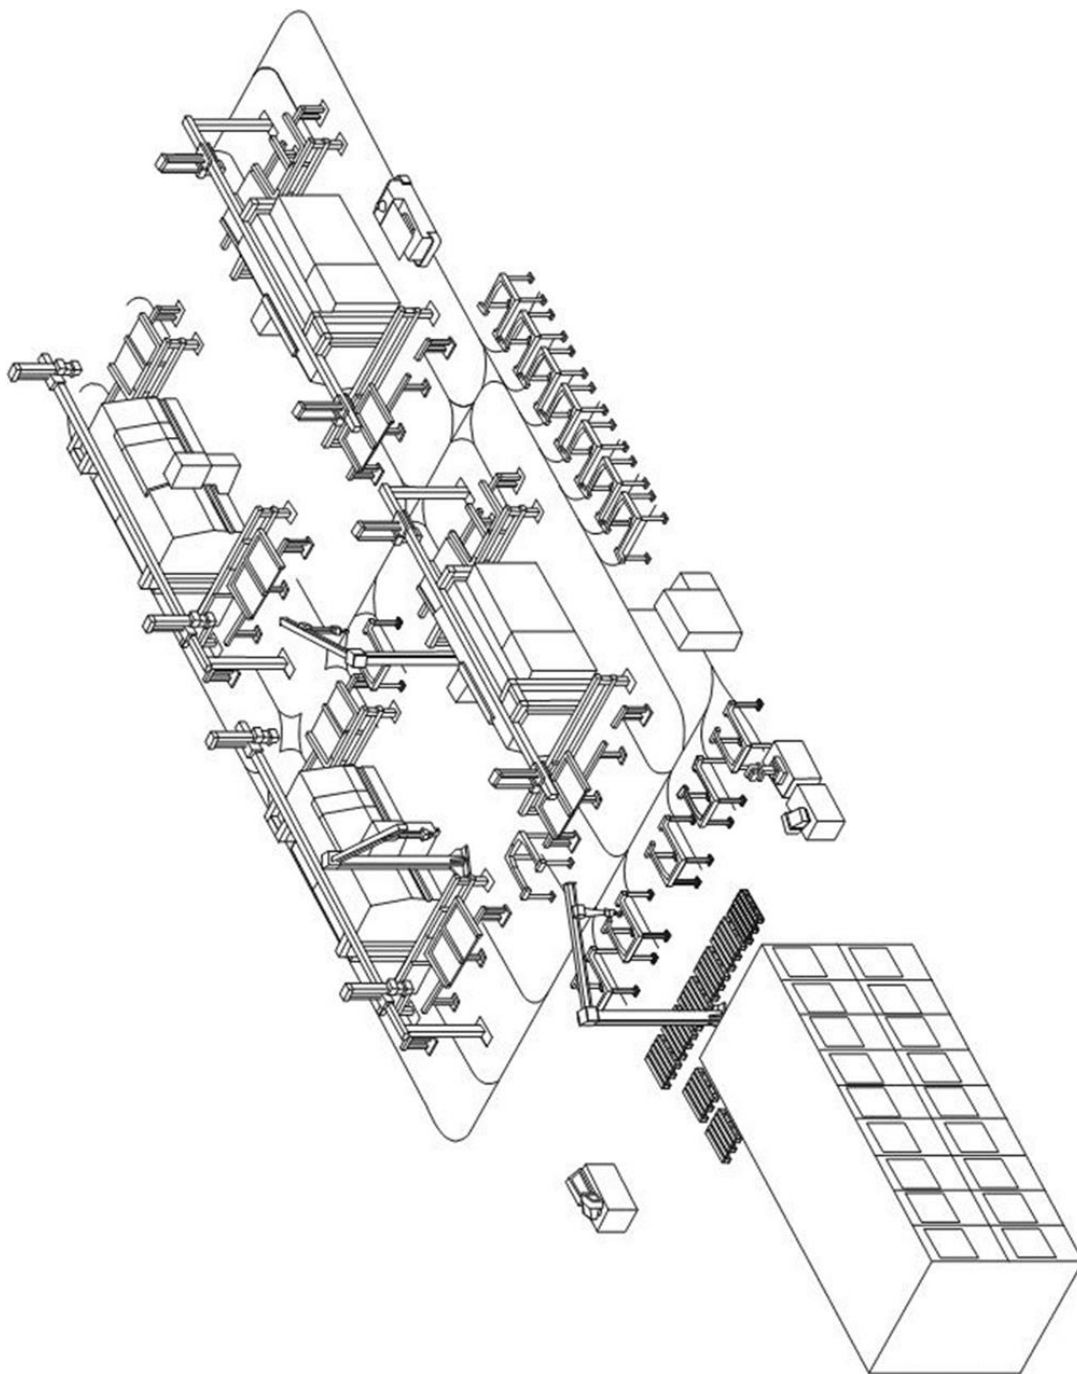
Flexible Assembly System for rotational parts (Katalinic, 1990)
